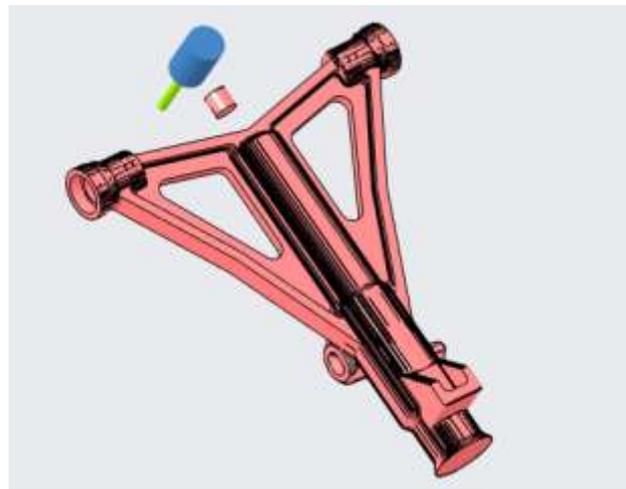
Contour milling of the top surface of the landing gear main shaft
